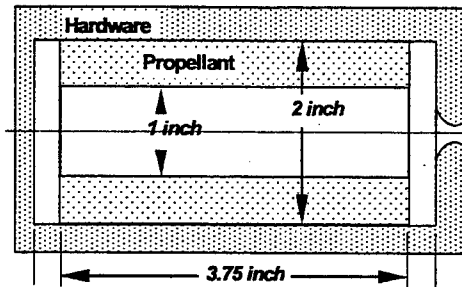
Schematic of 2x4-Inch Test Motor Geometry
